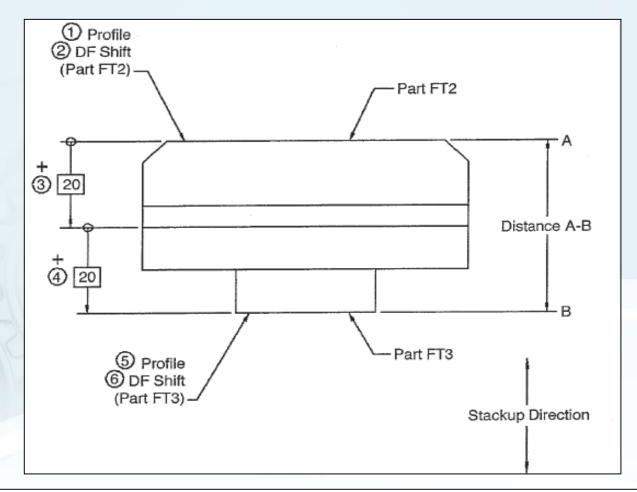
Form tolerances: Tolerance Stackup sketch for FT1.
